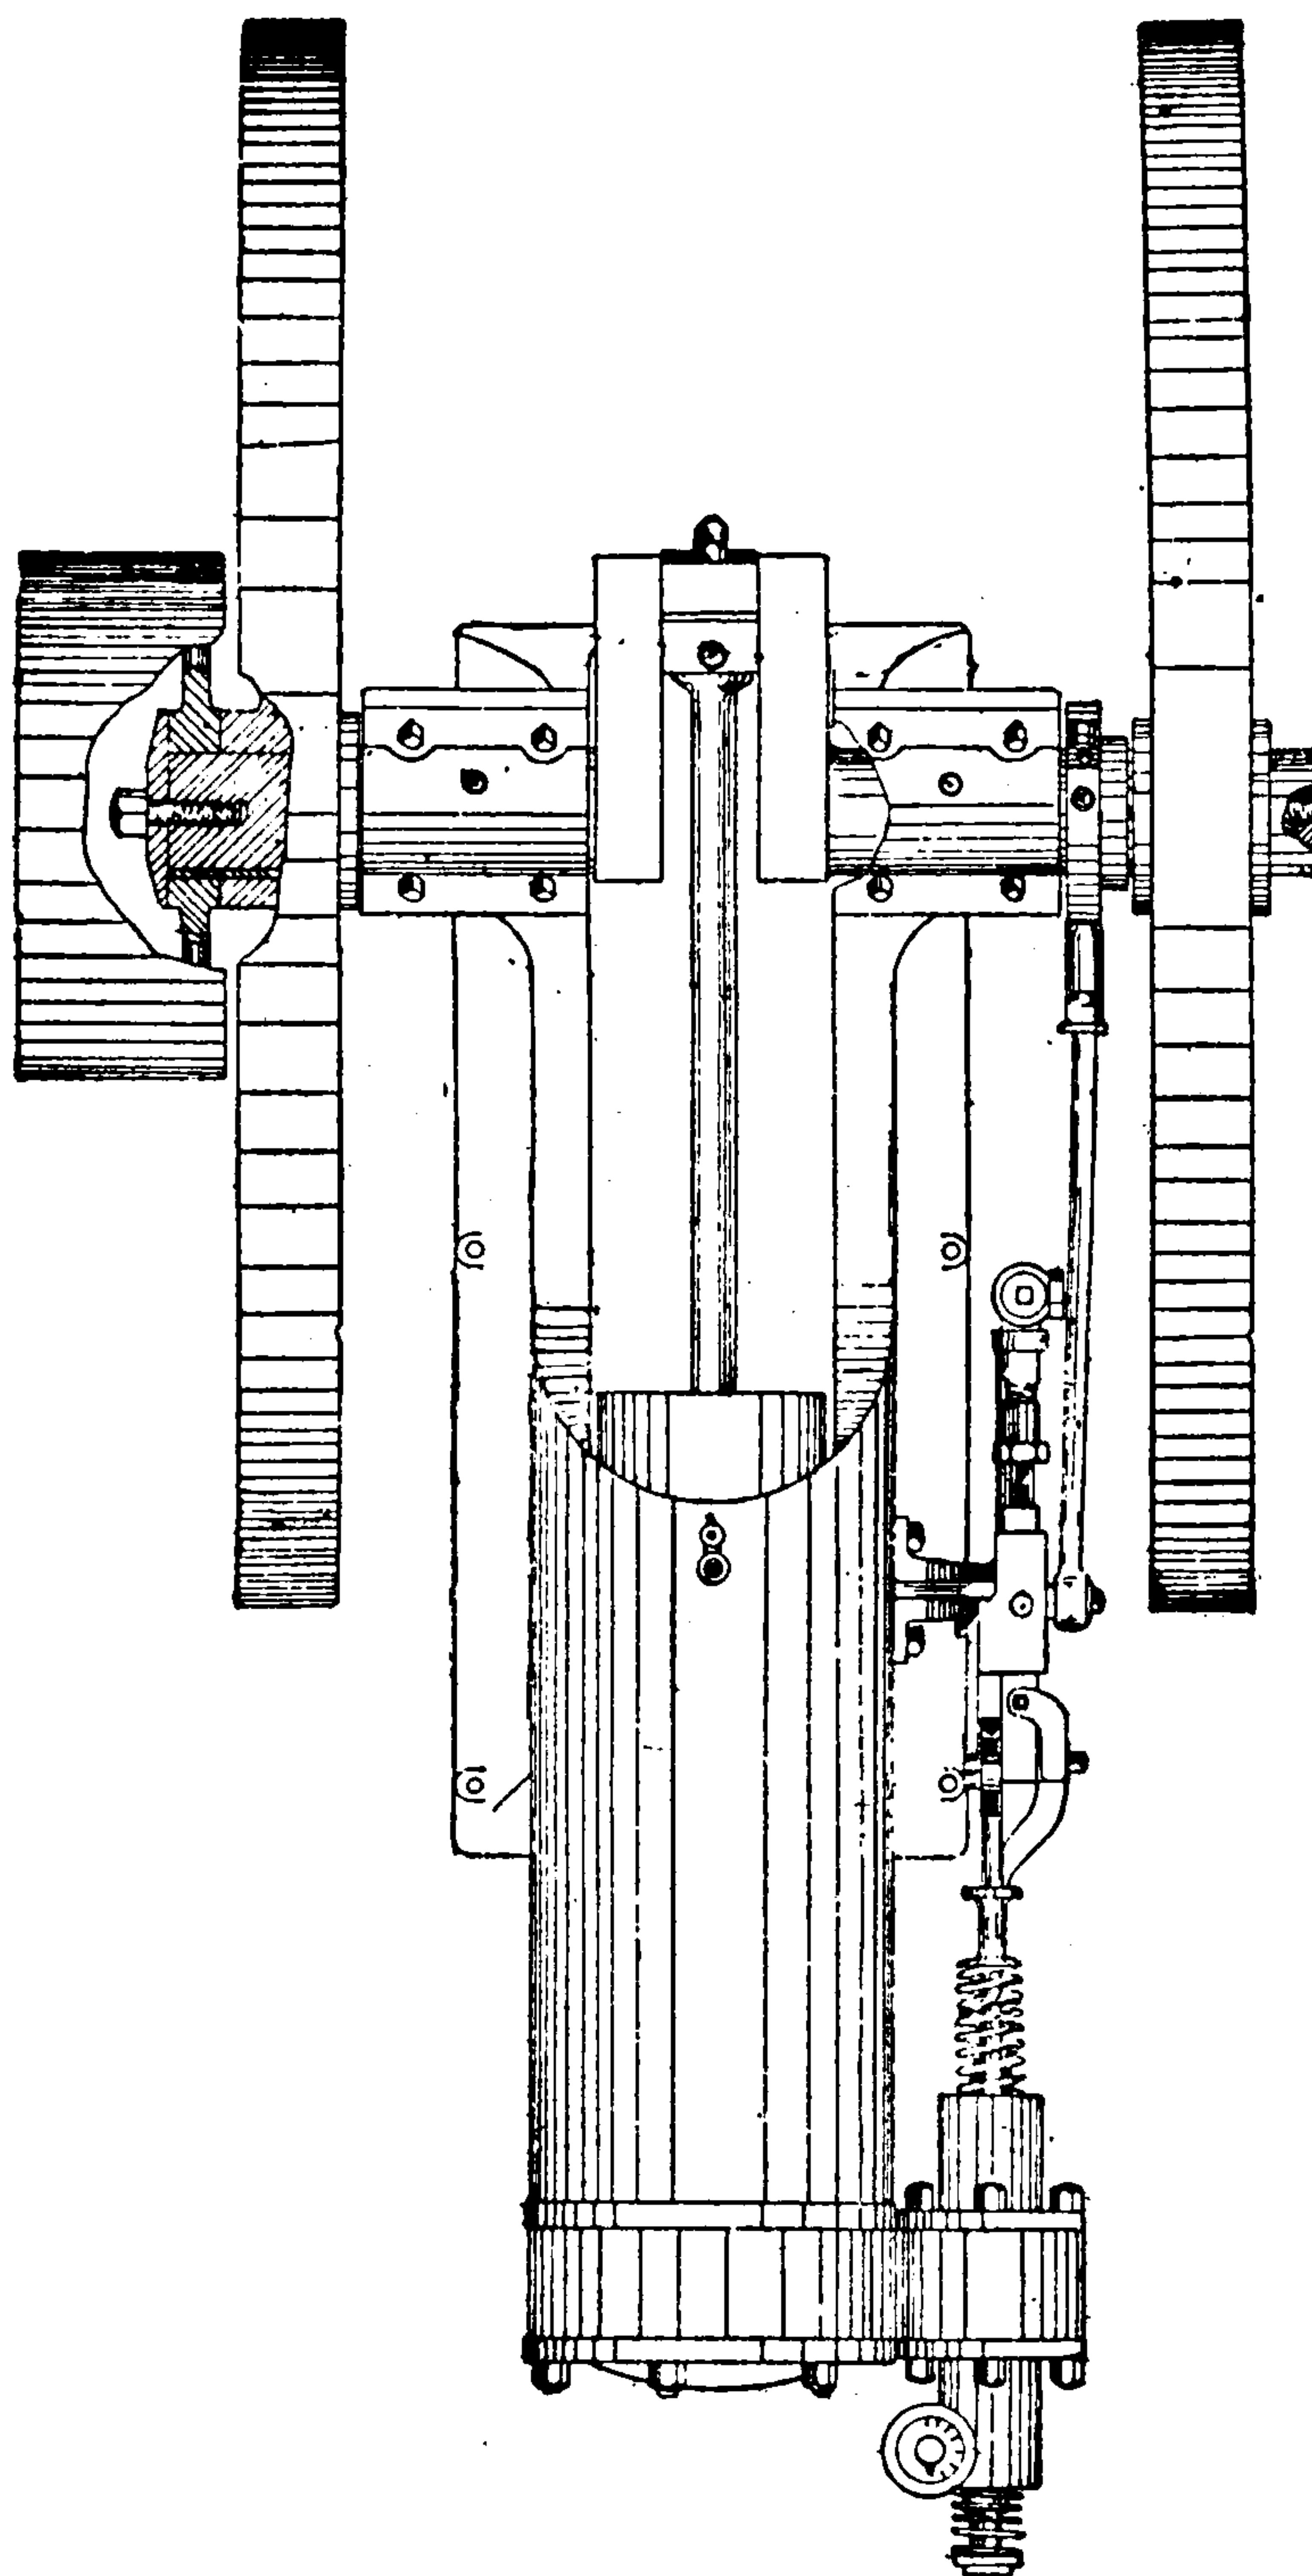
PLAN OF THE OLDS GASOLINE ENGINE.
